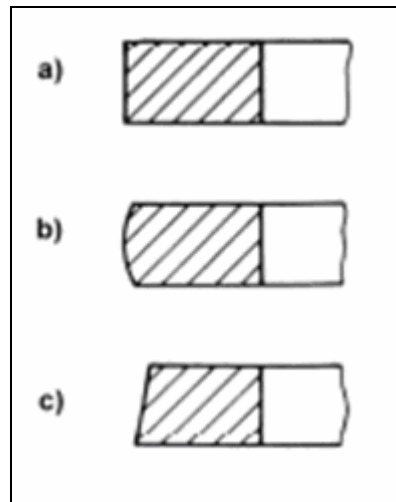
Ring Profiles a) Rectangular Shaped b) Barrel Shaped c) Taper Faced
